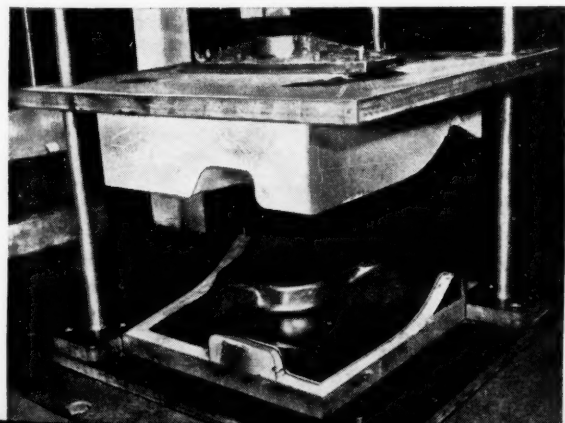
First Step in Forming Bomber Upper Ball Turret Housing
